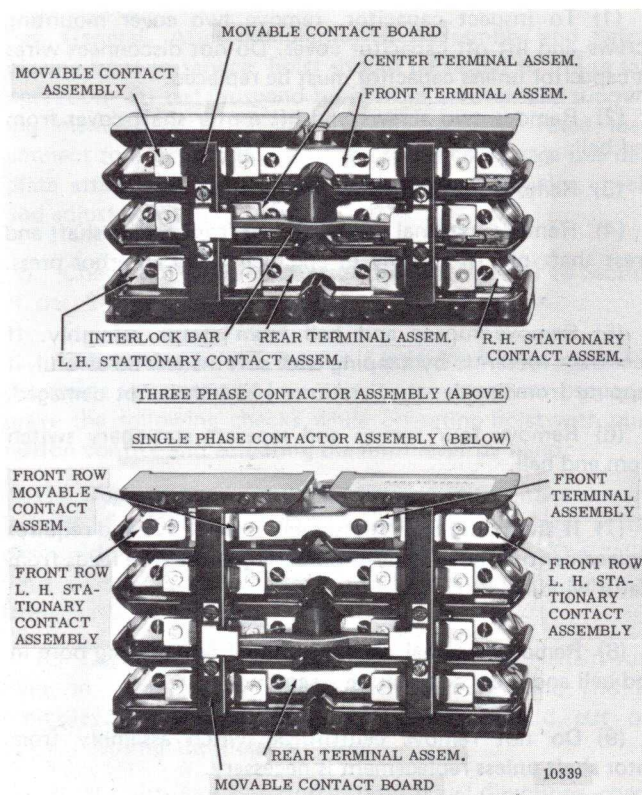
Bottom View Showing Single-Phase and Three-Phase Contactors.
